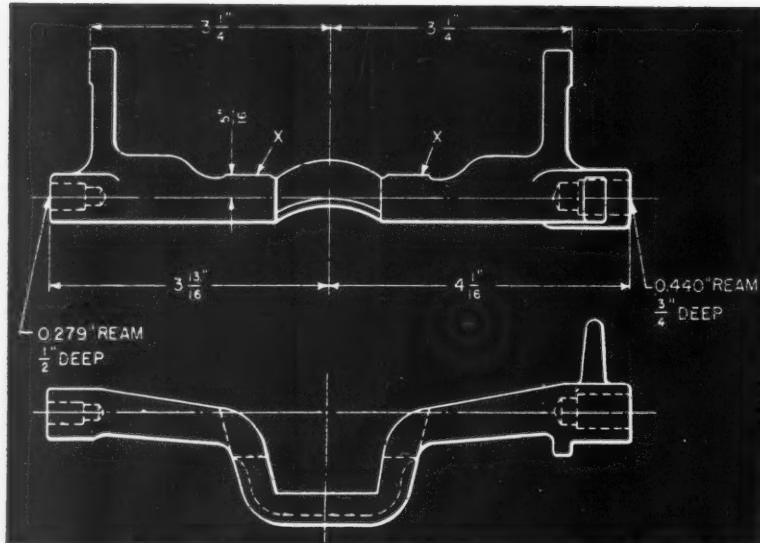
Cast-iron clutch lever milled in fixture shown in Fig. 1
